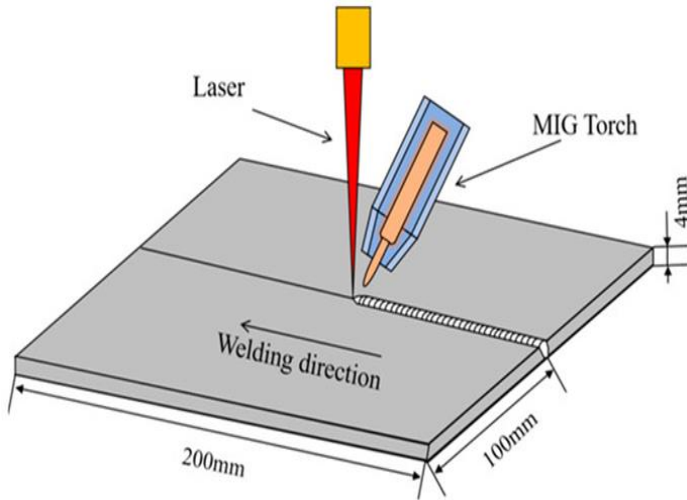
Schematic Diagram of Laser-MIG Hybrid Al Welding Process
